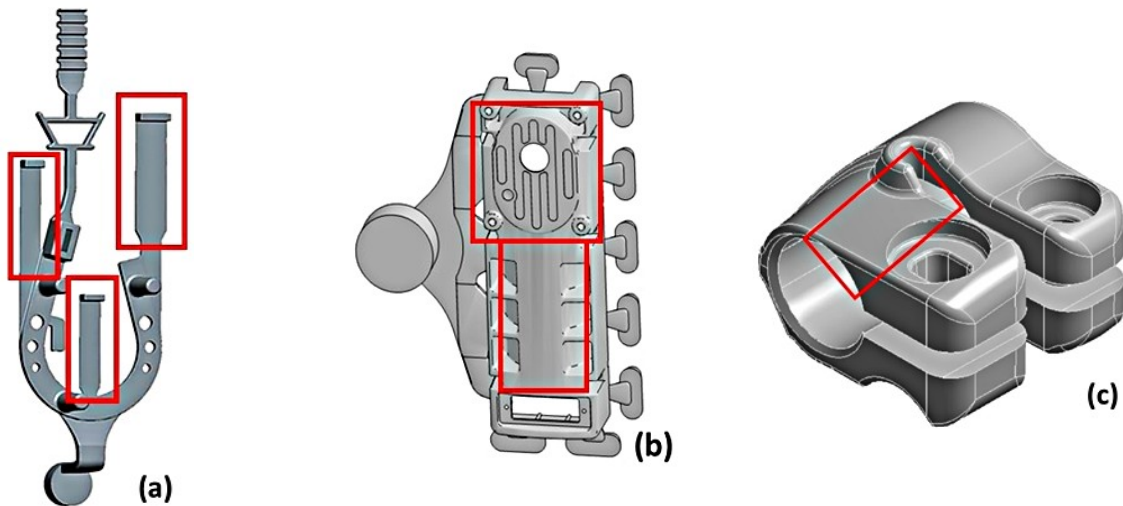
X-Ray inspection zones: (a) *Horse-shoe* reference casting, (b) Gear motor housing, (c) sleeve
